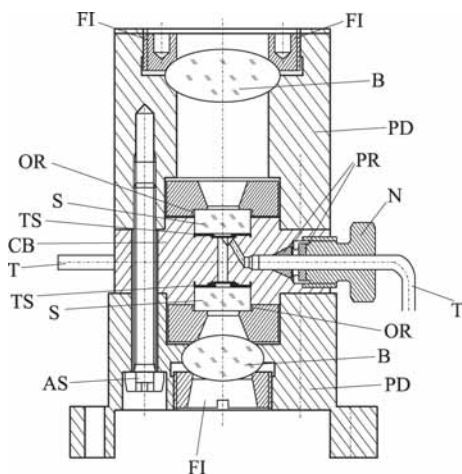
Scheme of the optical high-pressure flow-through cell. AS = adjustment screw; B = biconvex (glass) lens; CB = cell body; FI = fixture; N = nut; OR = O-ring seal; PD = pressure disk; PR = pressure ring; S = sapphire window; T = 1/16 in. capillary tube; TS = Teflon seal.
